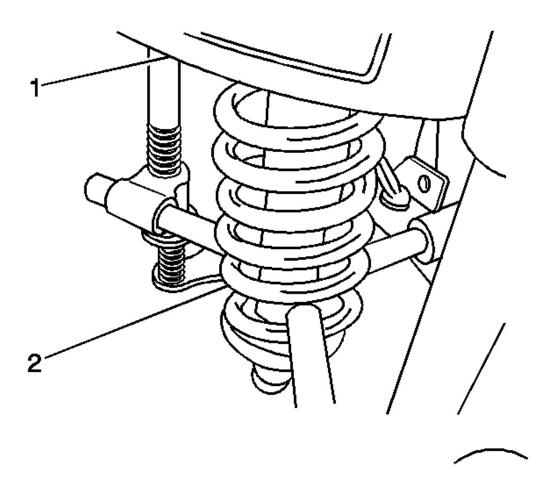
Compressing/Releasing Lower Part Of Shock Spring Courtesy of GENERAL MOTORS CORP.
